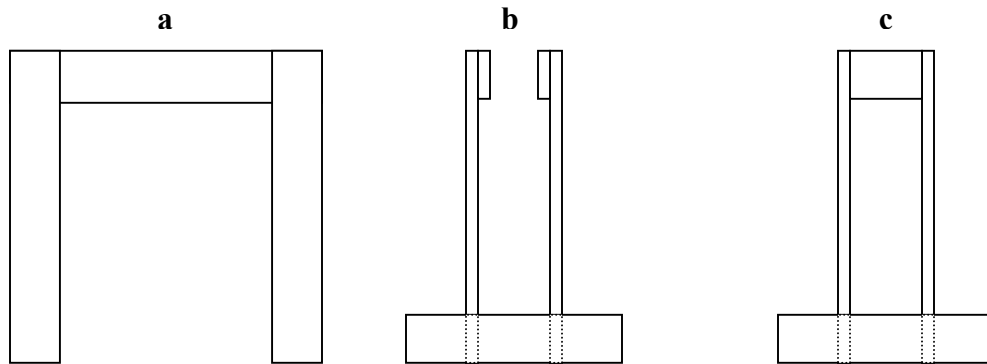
Building the platform body (a) top view connecting the sides to the back (b) back view showing screw placement and eyebolt hole position (c) bottom view middle support and eyebolt installed
